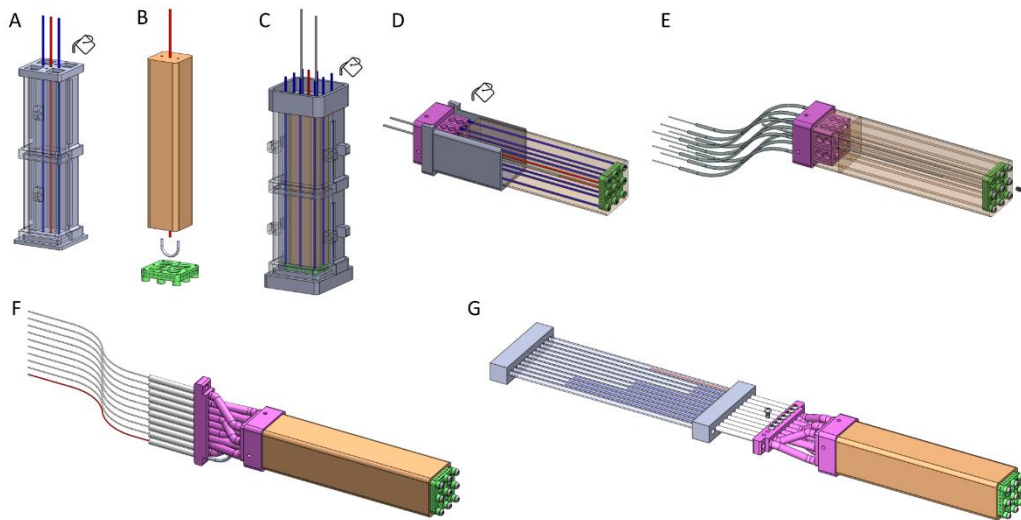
Elastomeric finger fabrication process. (A). Mold 1. (B). Connect vasculature to micro-fluidic pressure sensor. (C). Mold 2. (D). Mold 3. (E). Connect fibers. (F). Routing cables through base holder. (G). Integrate finger with Display Assembly.
